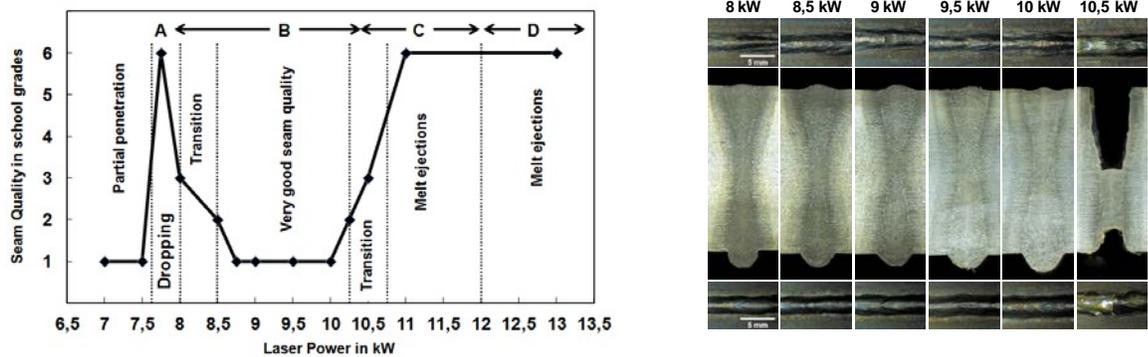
The influence of laser power on full penetration welds on 12 mm mild steel sheets at  $v = 1$  m/min.
